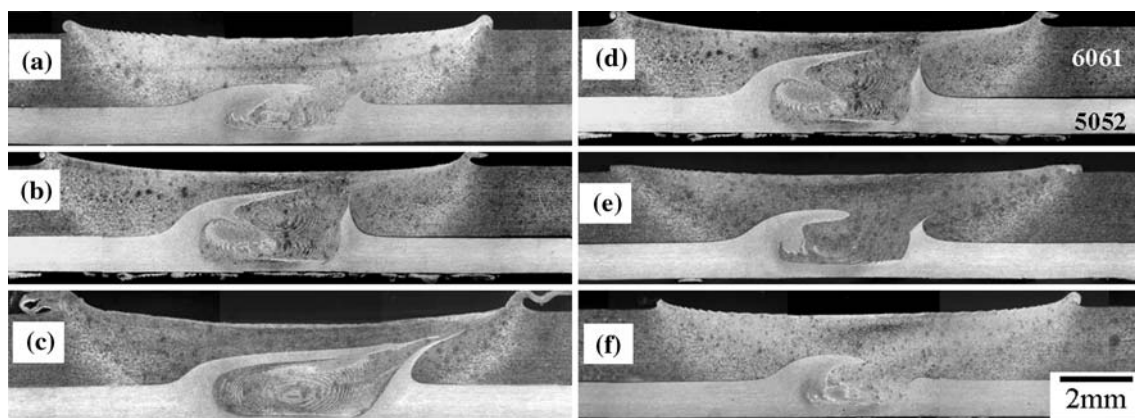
Optical macroimages of lap-jointed 6061 and 5052 in case A with various welding conditions: (a) 1250 rpm, (b) 2,500 rpm, and (c) 3600 rpm at fixed 267 mm/min, while (d) 127 mm/min, (e) 267 mm/min, and (f) 507 mm/min at fixed 1,600 rpm
